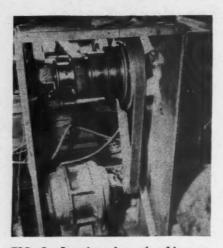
Interior view of cabinet enclosing independent lathe drive showing jack shaft and motor drive.
